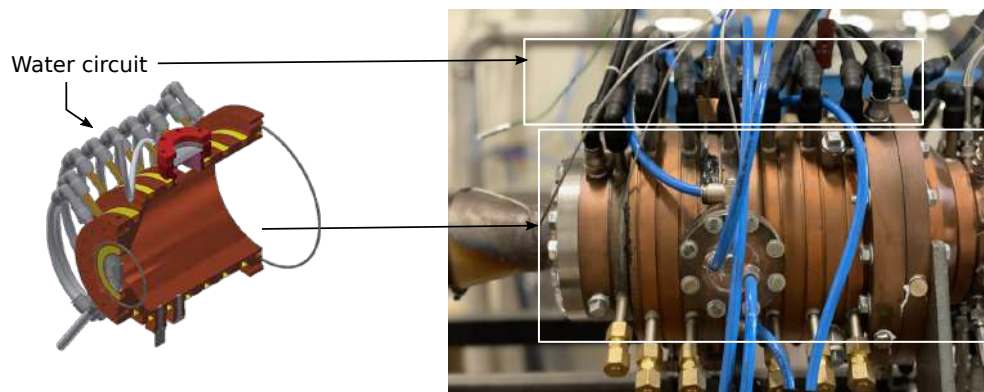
CAD view of the combustion chamber. Right picture shows the actual view of the combustion chamber
